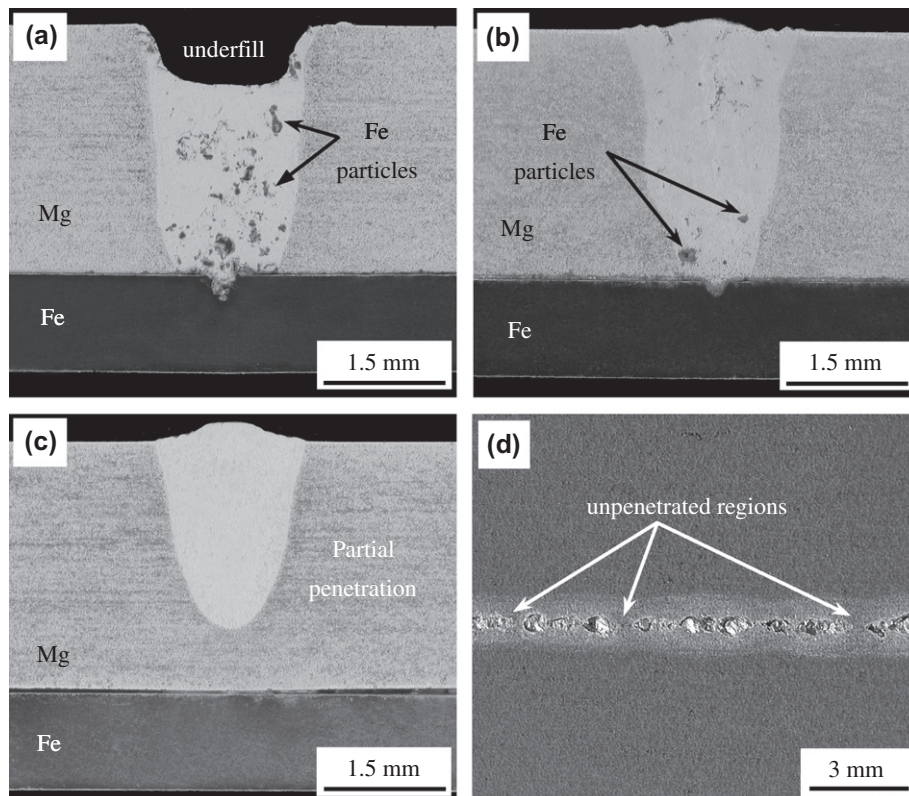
Cross-sectional macrostructures (as-polished steel specimen) of AZ31B/SP781 joints produced at 2 kW laser power and welding speed of (a) 2 m/min, (b) 3 m/min and (c) 4 m/min and (d) fracture morphology on the steel side of joint in (b).
